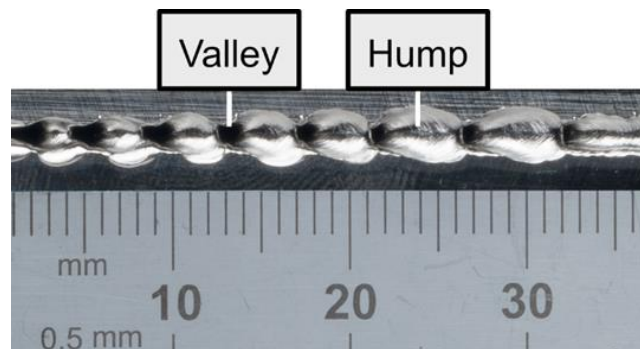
The hump weld bead in electron beam welding (focusing current 330 mA, beam current 18 mA, accelerating voltage 60 kV, welding speed 500mm/min, working distance 330 mm).
